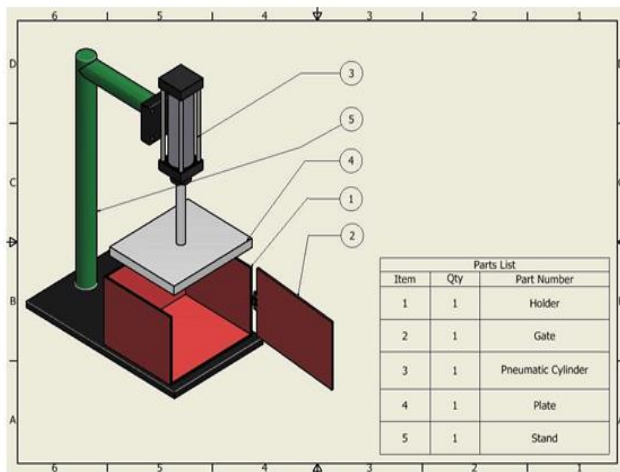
3-D Model of the machine is done using Autodesk Inventor.
